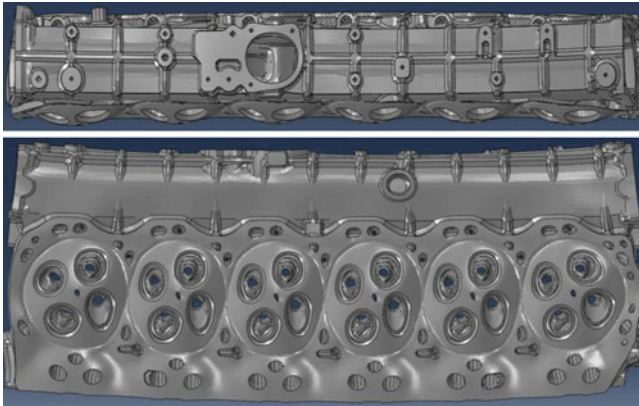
Cylinder head deformation in assembly plus thermal load case *Upper* side view, *Lower* bottom view. Scale factor: 200)
